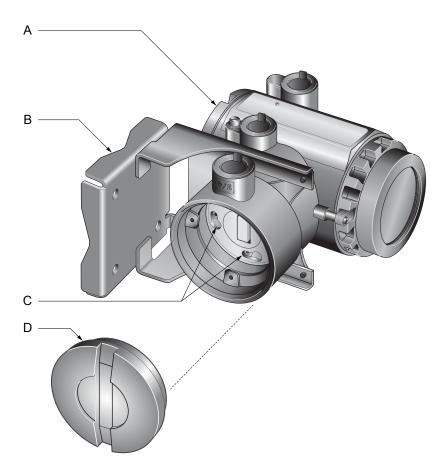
Components of a 4-wire remote mount transmitter (stainless steel housing)
